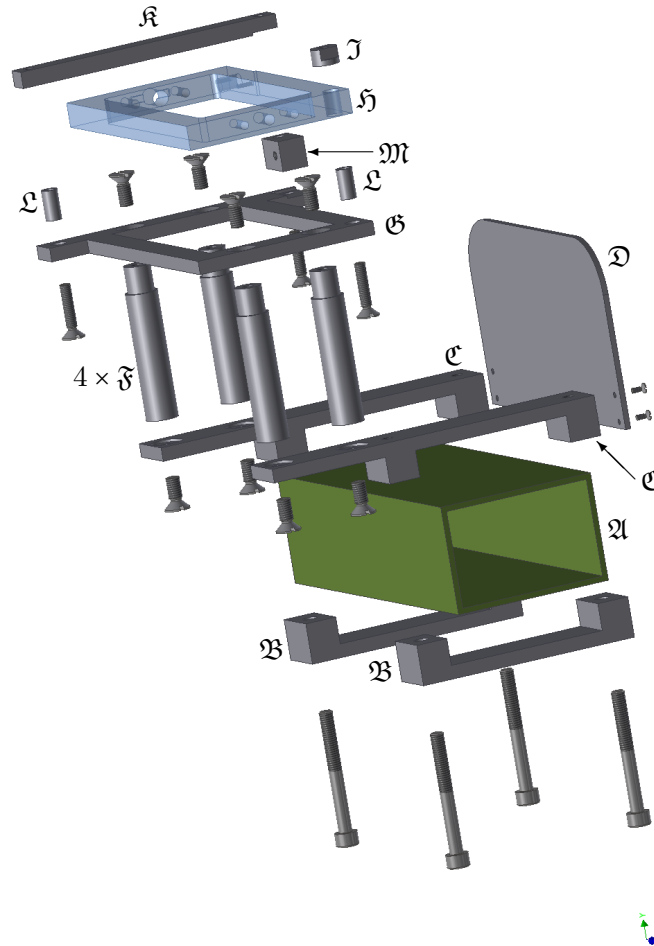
Fixed Part of the Fiber Positioner — The fixture is clamped to the frame (A, green) by four half shells (B, C). Two of them (C) carry a plate (D) to protect the optical fiber (not shown) and four distance pieces (F). A base plate (E) holds a frame (H, blue – also see Figure 2.47) which is able to pan. It is held in place by a nut (J), a bar (K), and three spacers (L, M).
